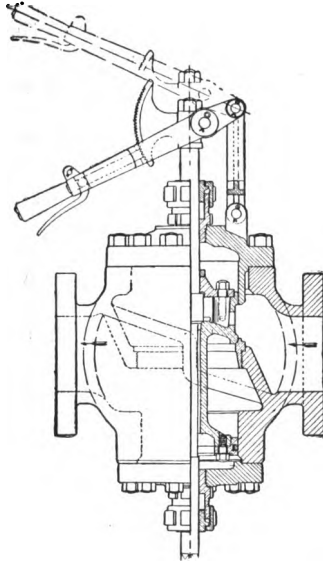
Throttle Valve. [Schutte & Koerting, Phila.]
